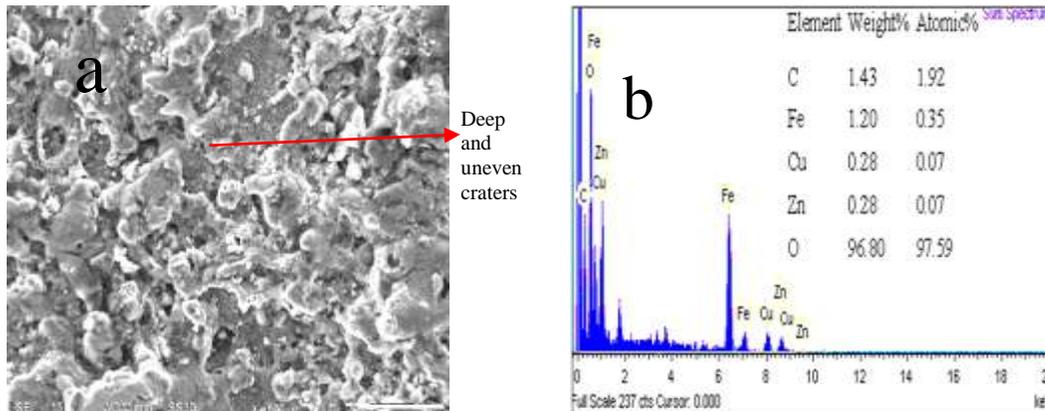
SEM (X 500) (a) and EDS (b) Photograph of Workpiece Surface Machined by Untreated Wire (Pulse Width- 0.4 μ s and Wire Tension -0.6daN)
